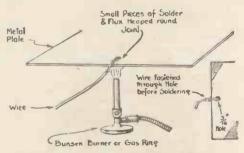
Hint for making a really good scldered joint between earth lead and plate. Important point is use of burner or gas ring for heating instead of soldering iron
